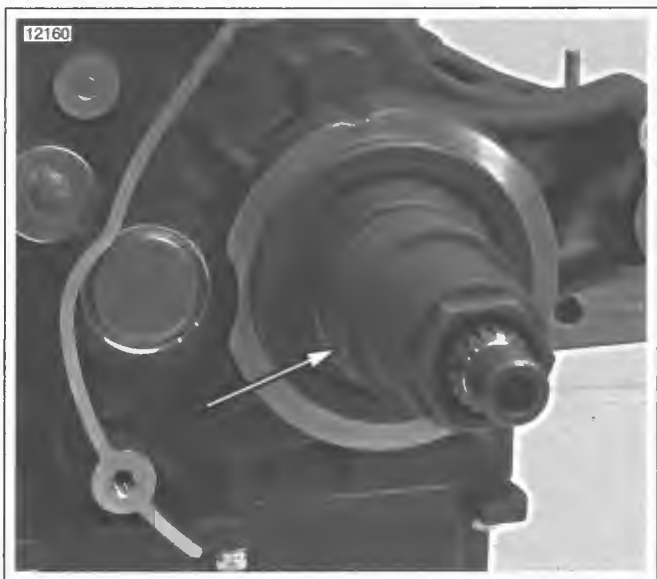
Install Adapter (Part No. HD-47856-3)
